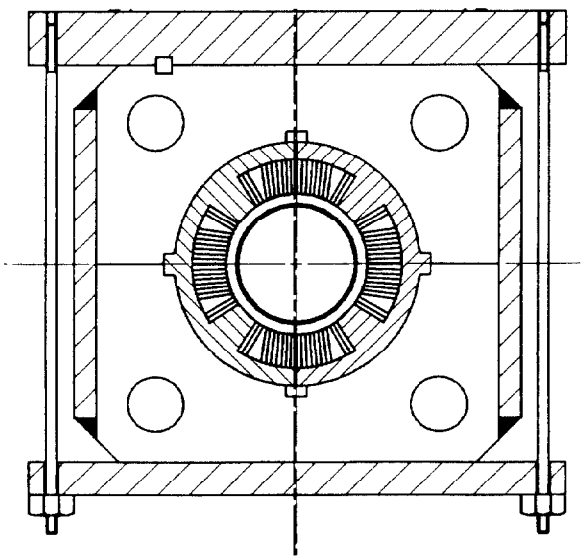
Cross section of quadrupole in "square" yoke showing welds and support structure.
